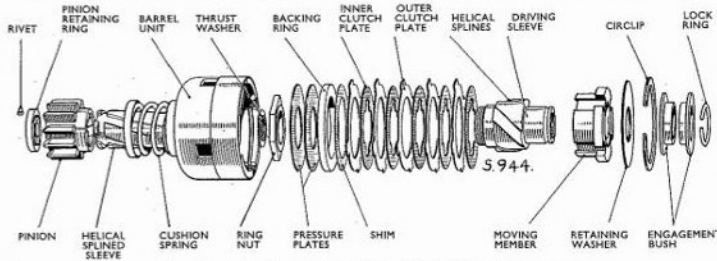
Self indexing clutch drive details (M45G type starter motor)
